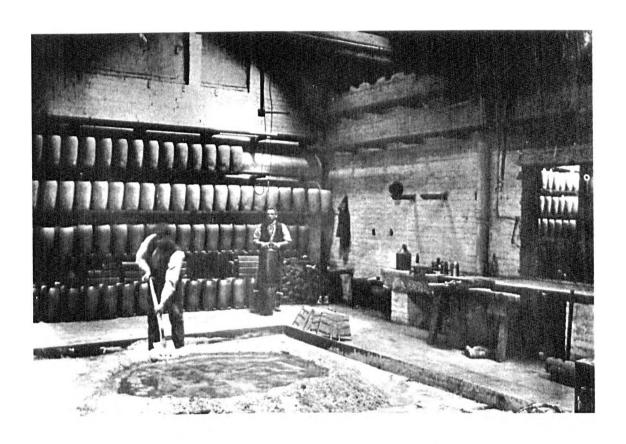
Mixing finely sieved clay and water on the treading floor of a large pot house connected to melting furnaces at Jessop's Brightside steelworks.
